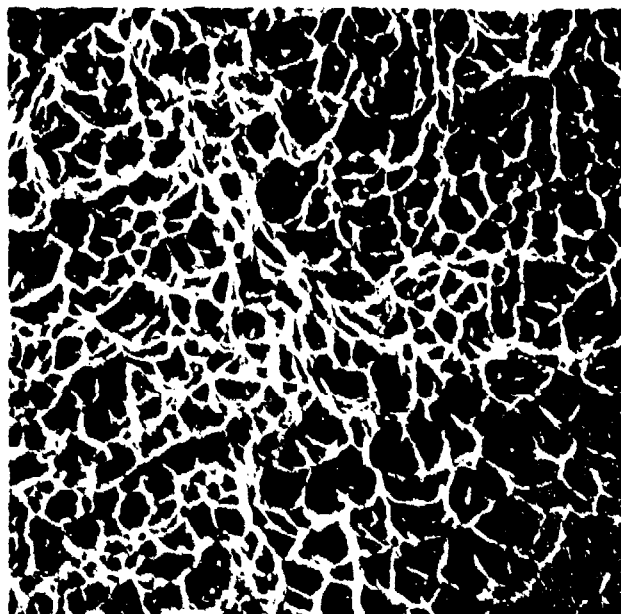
Tensile overload region of an A-514 weld fracture surface, 1500x.
